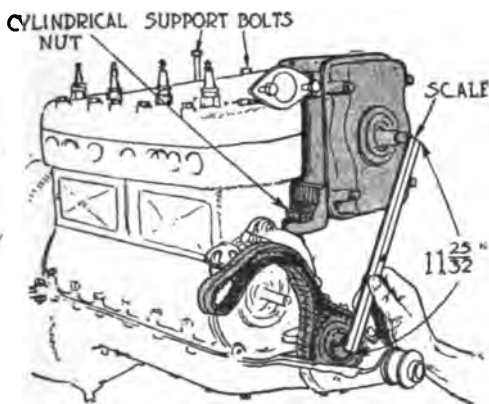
Adjusting the distance between the centers of the crankshaft and the shaft of the electrical unit. This distance should be exact
